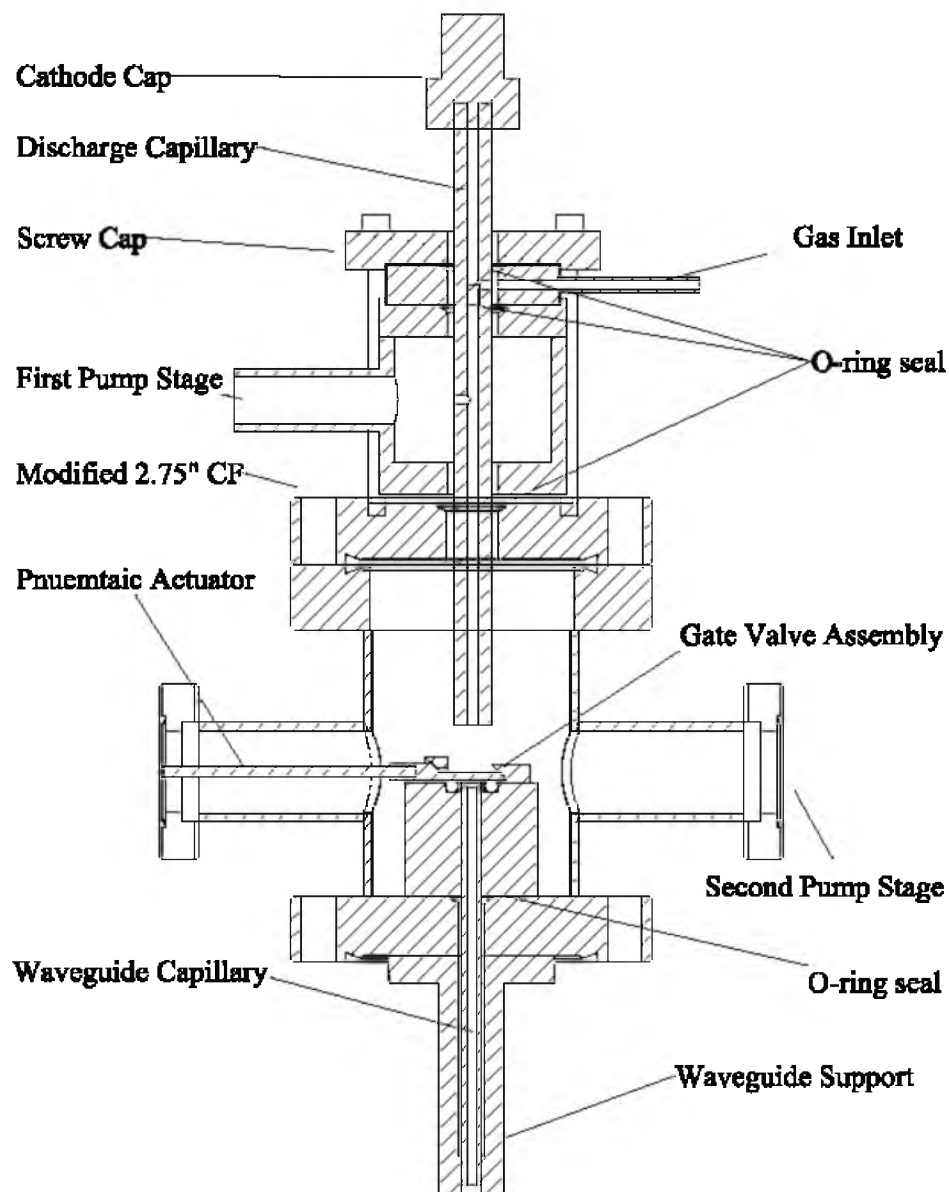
Cross-sectional view of the lamp highlighting the major components of the lamp, and how it is assembled.
